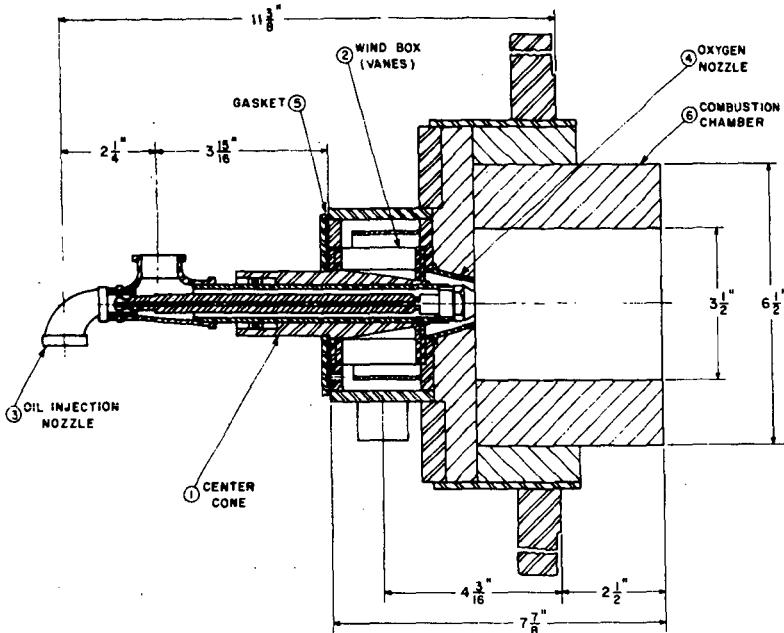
SECTION VIEW OF ASSEMBLED BURNER
